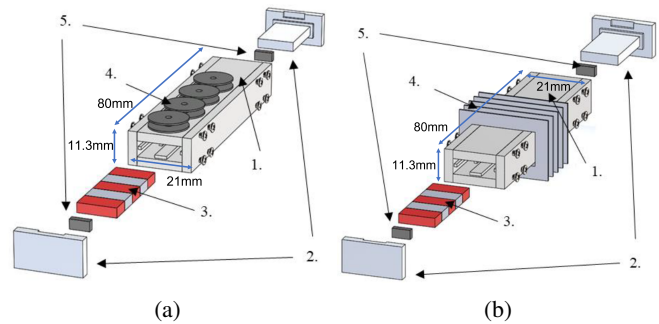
Exploded view of the prototypes (a) Design 1 (b) Design 2.
